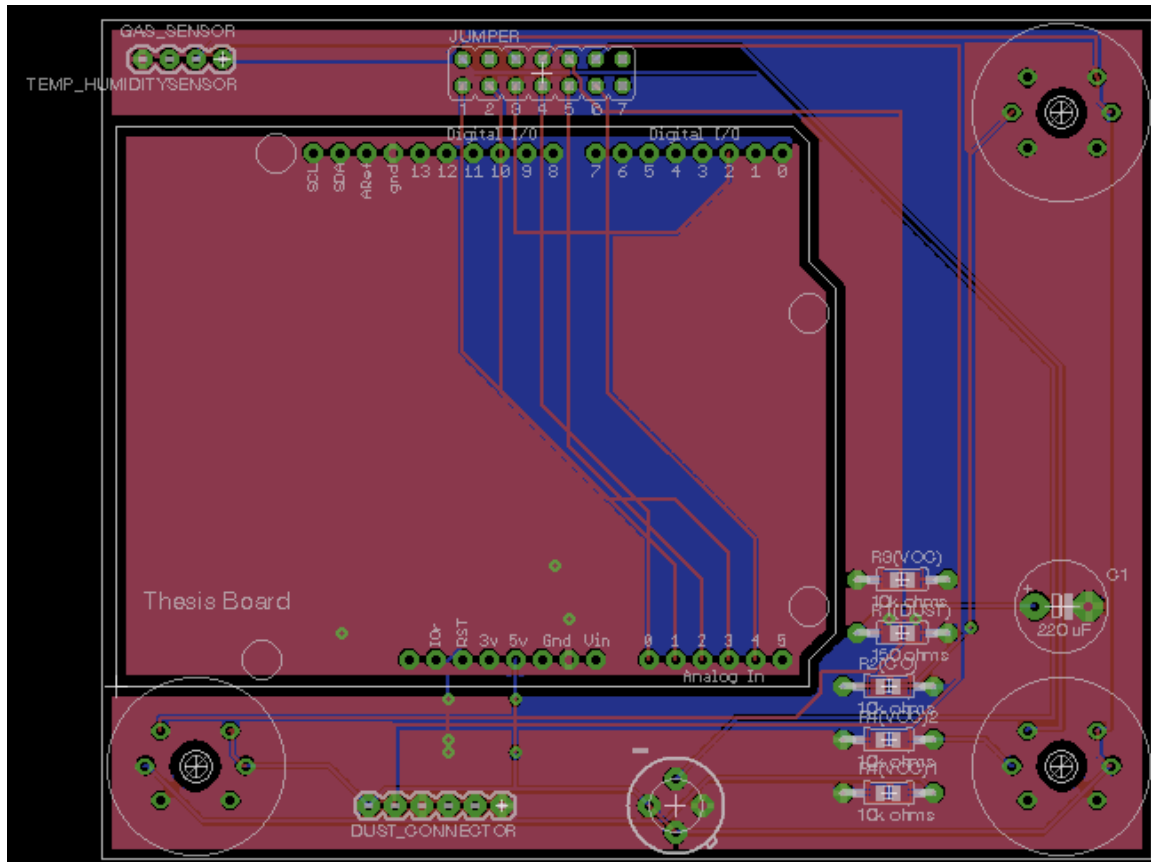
PCB Layout for IAQ Sensor Shield
